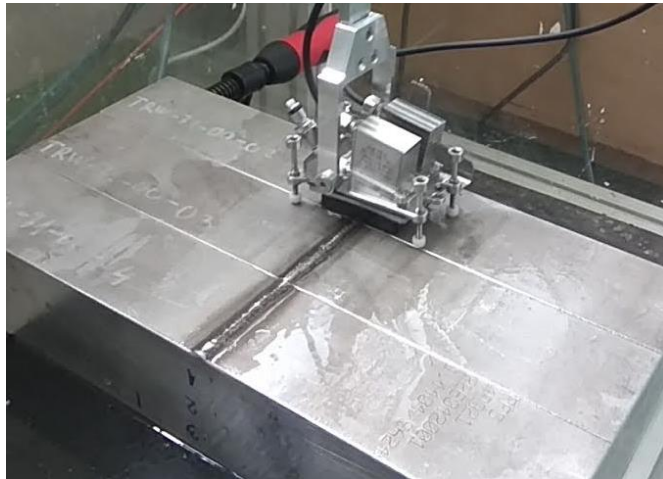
Developed UT probe positioned across the qualification blocks weld
